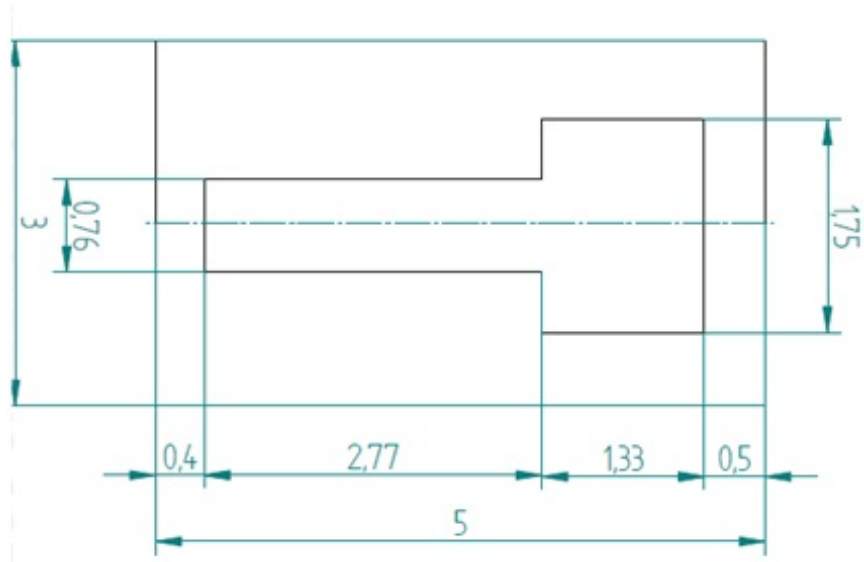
Drawing of 580 μm spacer with dimensions shown in mm
